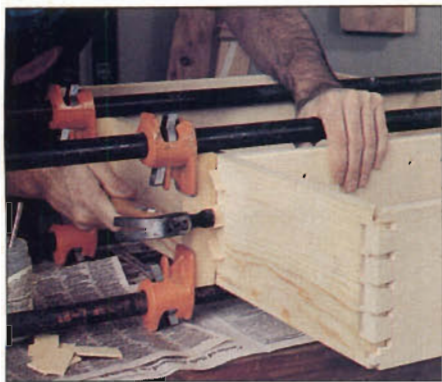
Photo I: Assemble the dividers to the top and bottom, then drive the sides part way on without glue to help square the assembly. Draw the dividers tight, then drive wedges into the tenons.
